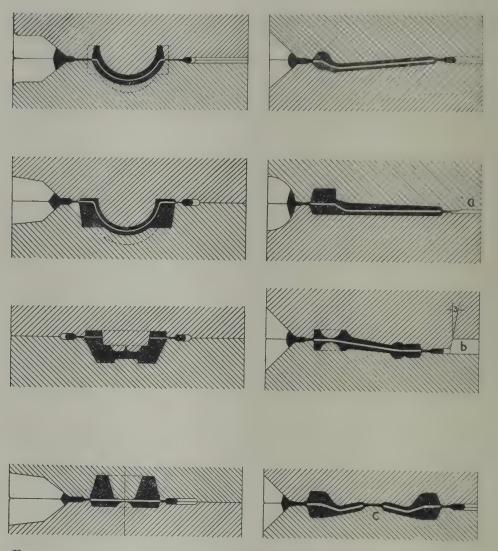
Typical examples of die parting surfaces in drop forging dies: (a,b)—Counter-inclined; (c)—Locked die balance by inclusion of two final impressions opposite to each other
